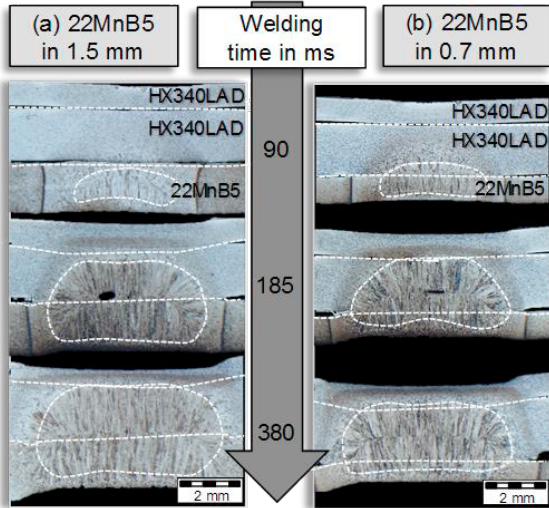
Nugget cross-sections are showing nugget formation with respect to weld time of 90, 185 and 380 ms at 7.5 kA weld current: (a) 22MnB5+AS150 in 1.5 mm; (b) 22MnB5+AS150 in 0.7 mm
